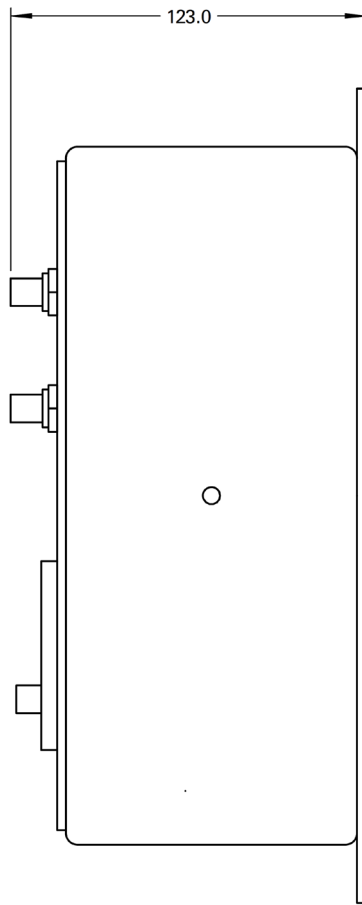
Box layout and mounting (All dimensions nominal and in millimetres)
